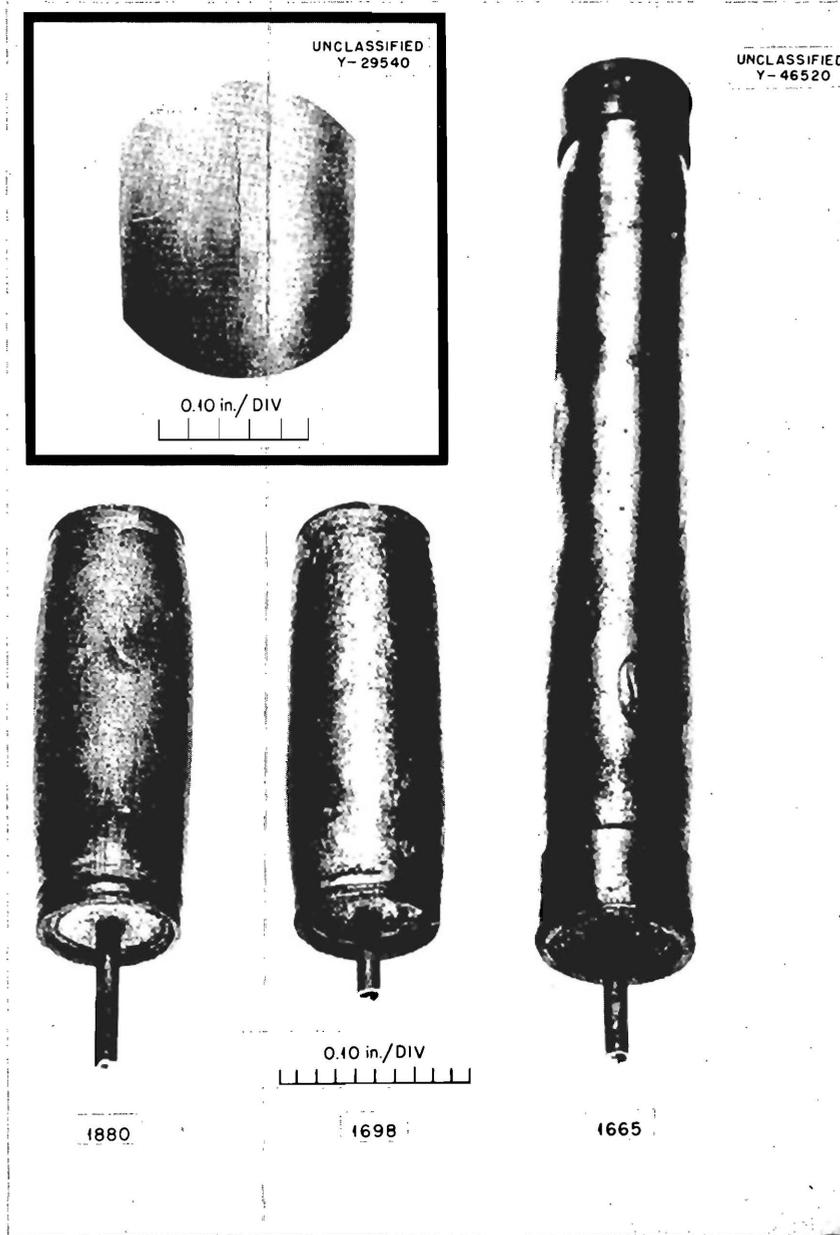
Typical Specimens After Testing; also Closeup of a Failure.
